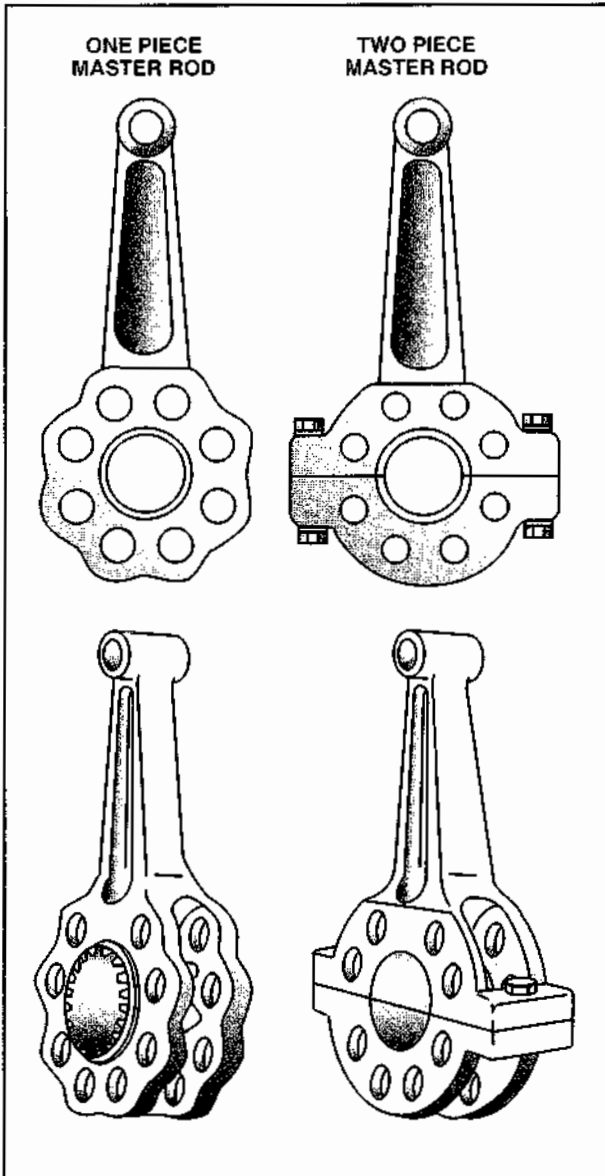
On a single piece master rod, the master-and-articulated rods are assembled and installed on the crankpin before the crankshaft sections are joined together. On a multiple piece master rod, the crankpin end of the master rod and its bearing are split and installed on the crankpin. The bearing cap is then set in place and bolted to the master rod.
